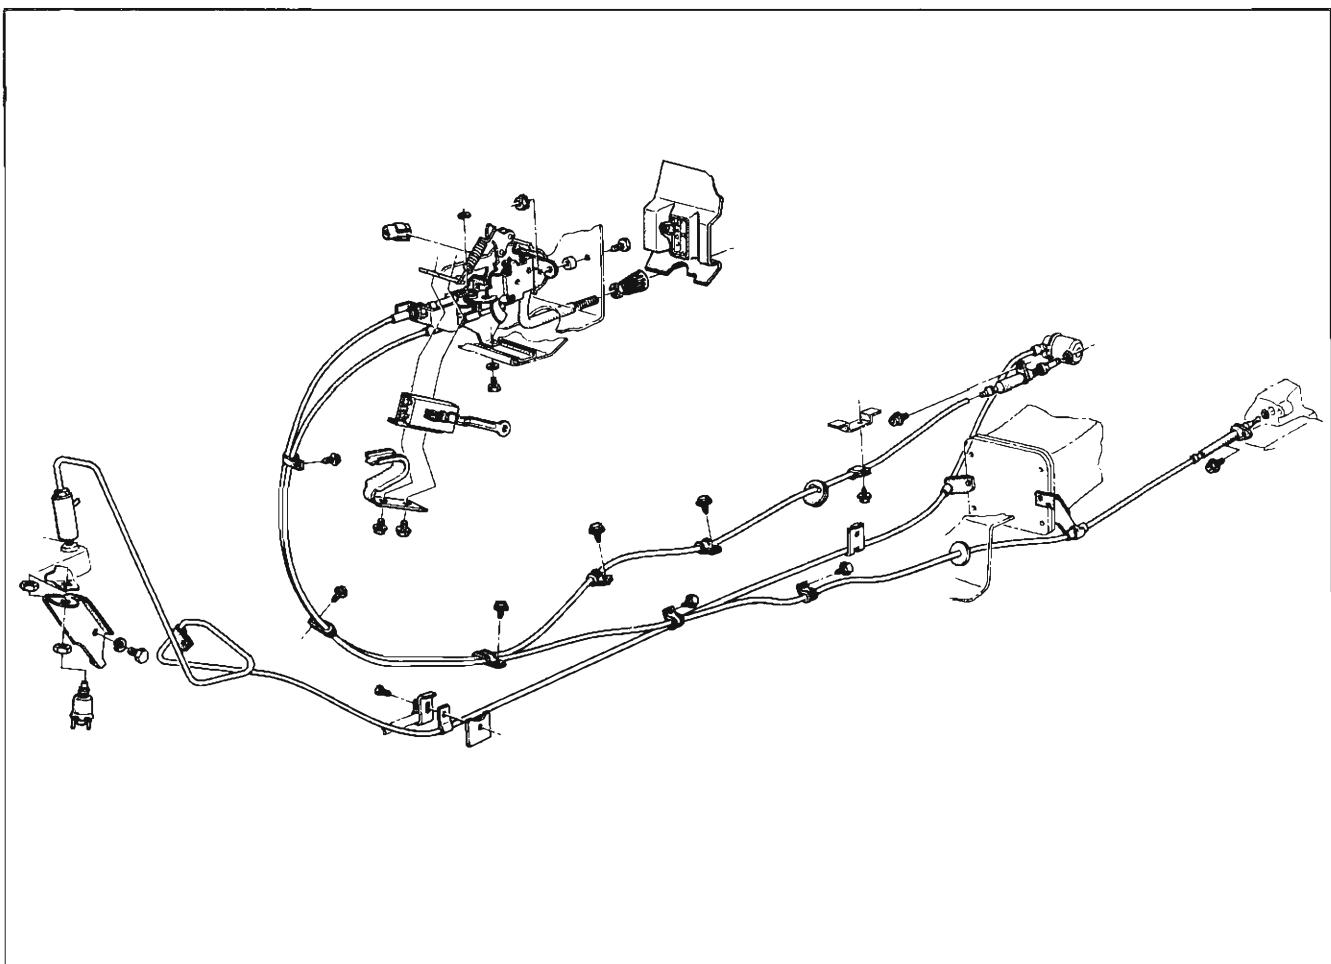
A-18 Transmission and Parking Lock Control Cables—Dash Mounted
